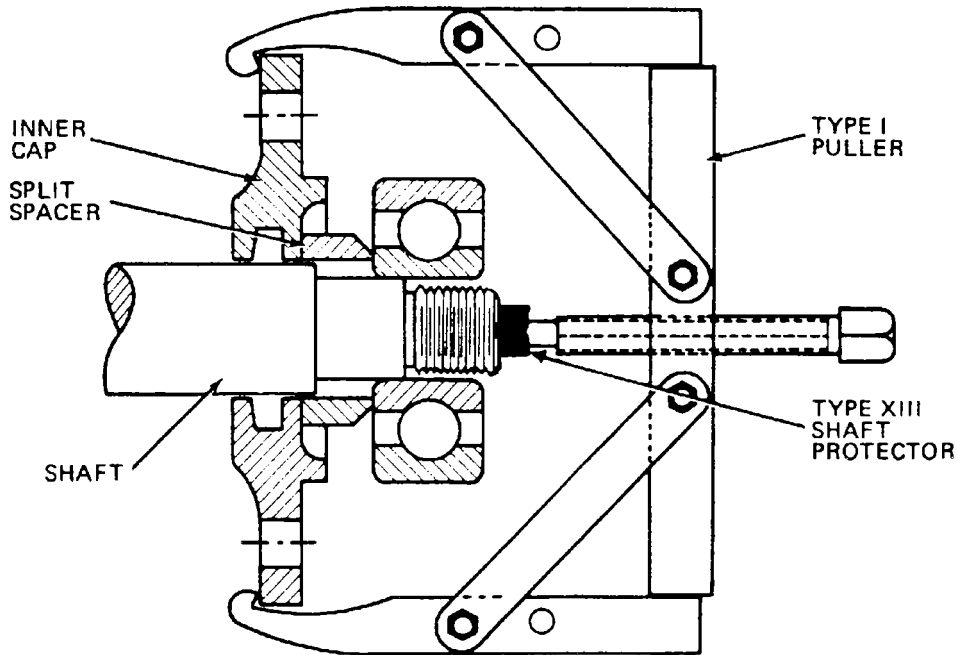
Split Spacer Allows Use of Cover to Remove Inner Ring
